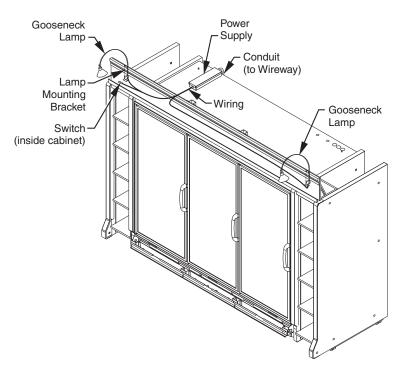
Goose Neck Lighting Installation (Dry Goods and Bump Out -Dry Goods ONLY)
